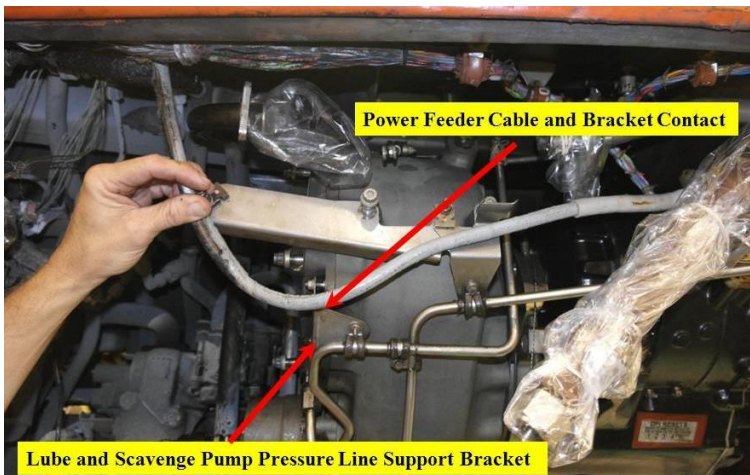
POWER FEEDER CABLE NO. 3 REINSTALLED SIMILAR TO EVENT INSTALLATION ORIENTATION
